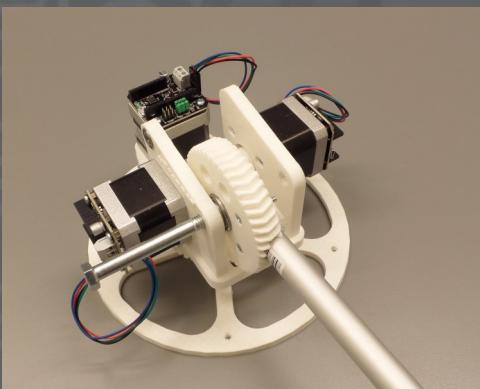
Slide in the M8 main bolt (with a washer between side plate and gear).
